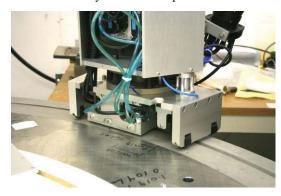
End effector for ultrasonic and eddy current weld inspection.
